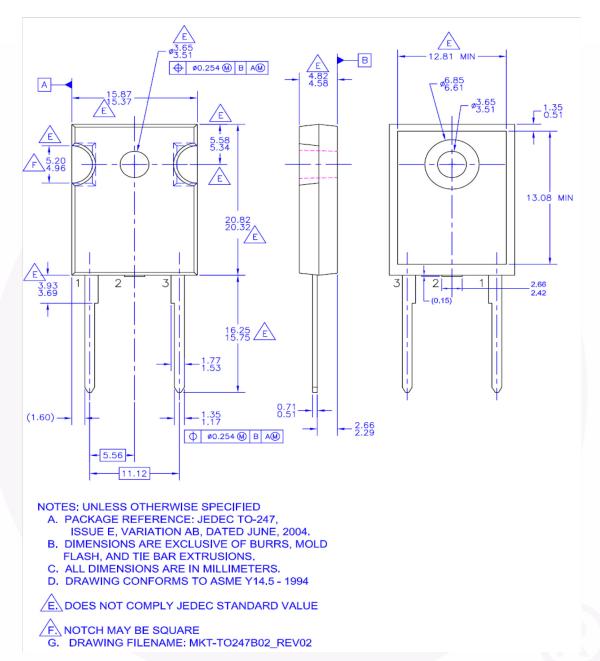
TO-247, Molded, 2LD, Jedec Option AB
